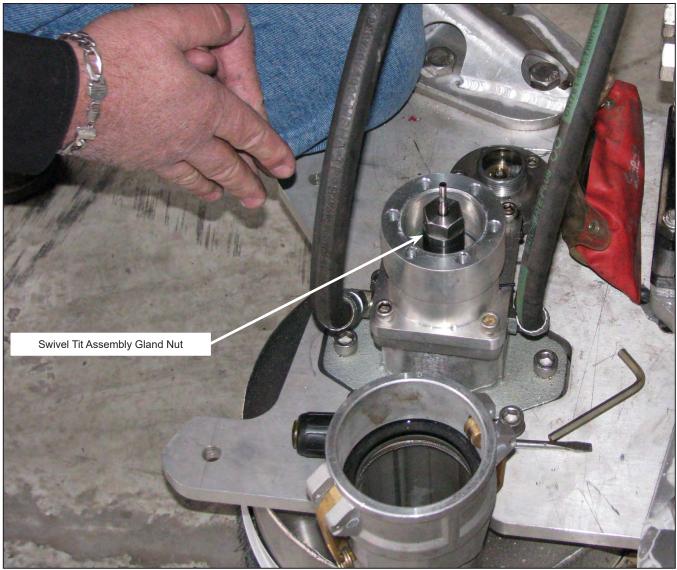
Swivel Tit gland nut to be removed by turning counterclockwise with a 15/16" deep well socket or box end wrench.
